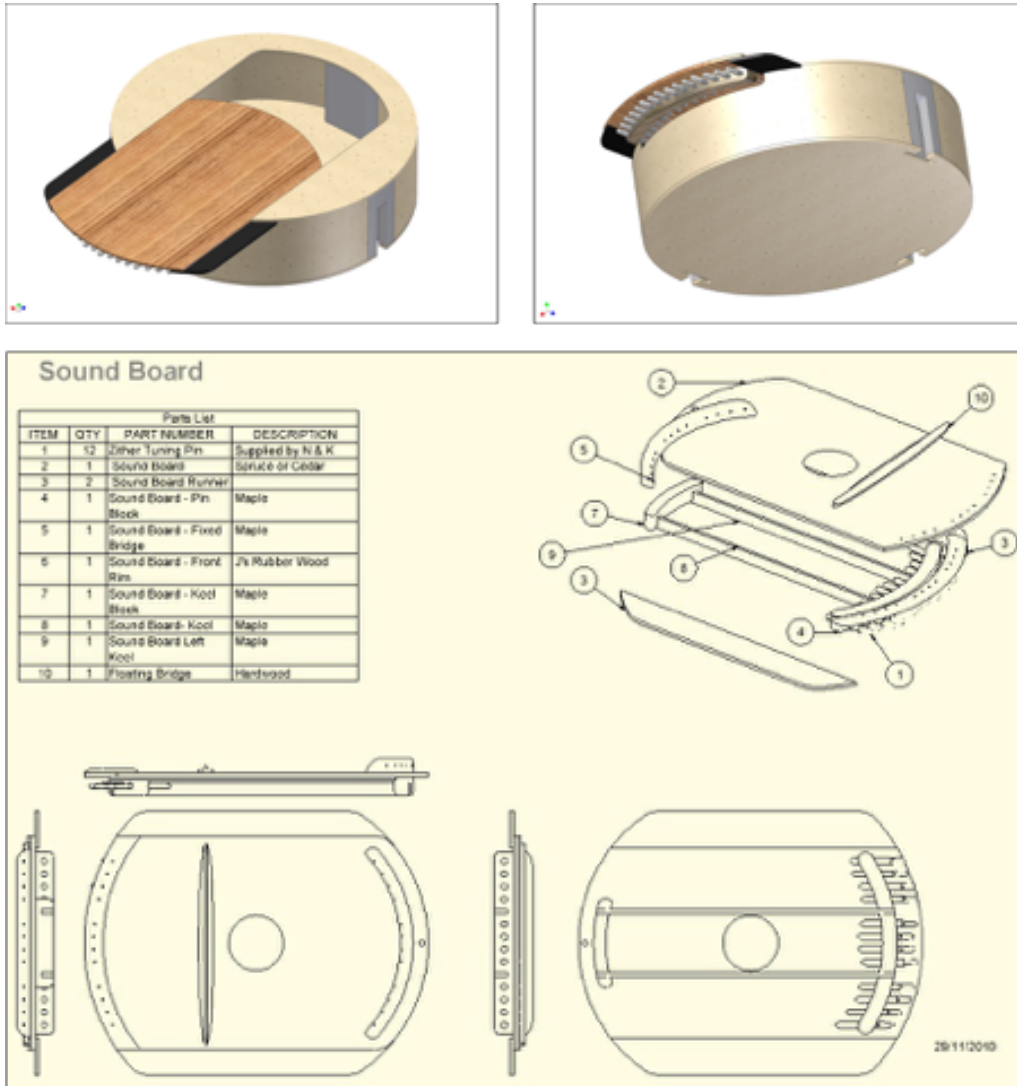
f: 3D CAD drawings of stringed pod with slide-in soundboard keel by NR.
